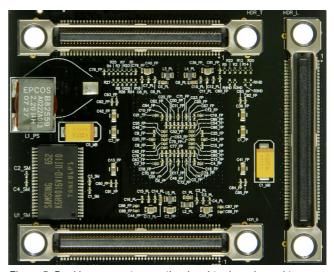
Docking connectors on the daughter board, used to attach the board to the NB2DSK01 motherboard.
